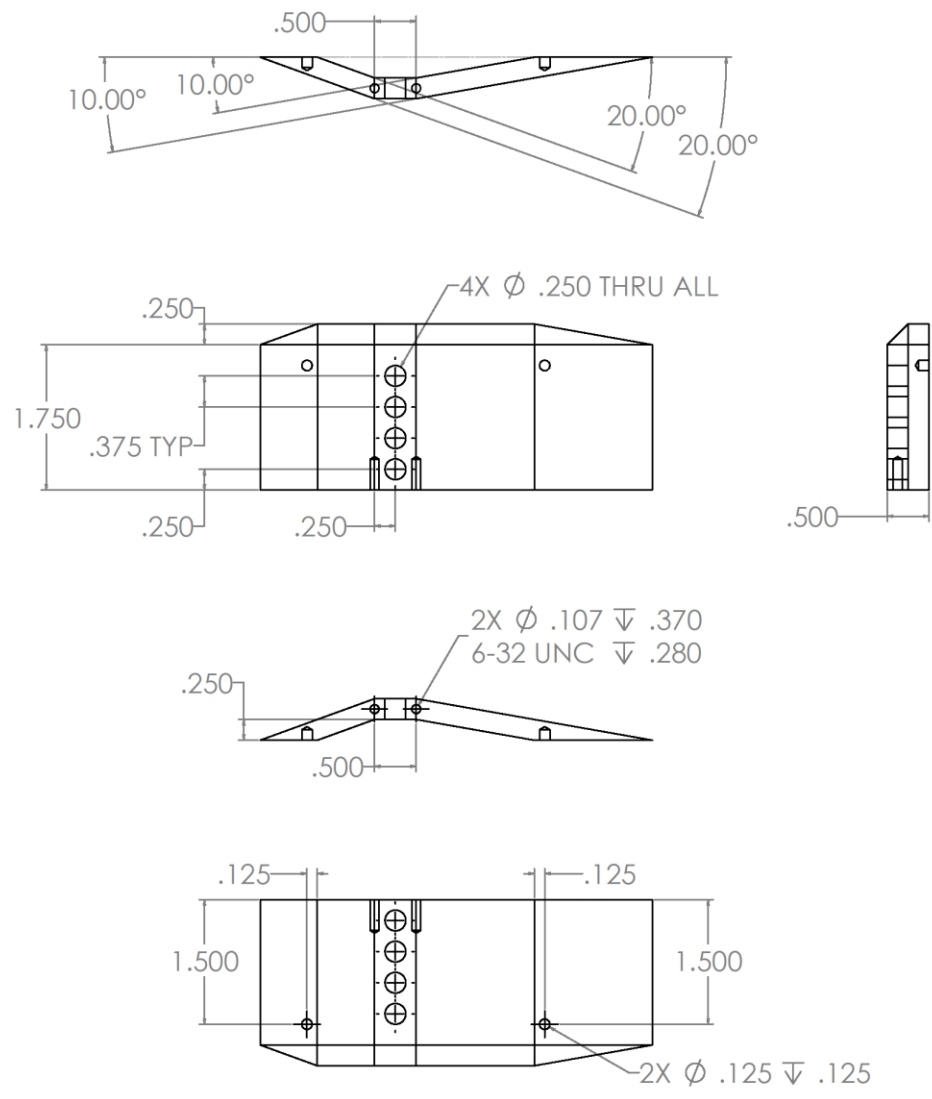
Drawing of Mach stem generator wedge model left outer strut.
